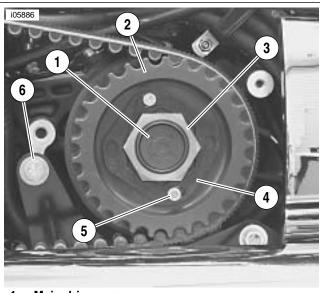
Attaching Holding Tool to Final Drive Sprocket
